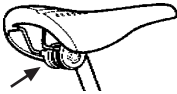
Loosen saddle clamping bolts to adjust saddle position.
